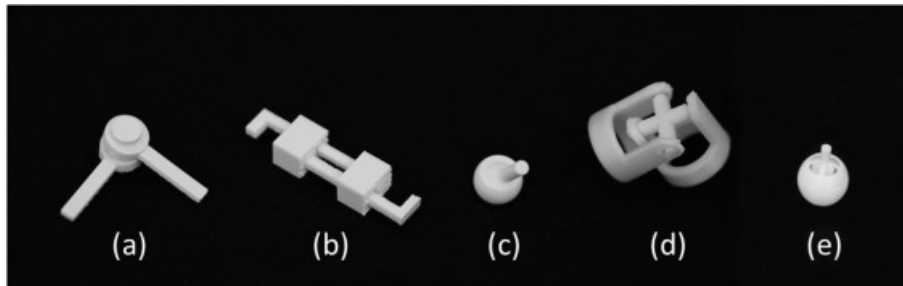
Examples of joint concepts created by non-assembly AM. a) Revolute joint, b) Prismatic joint, c) Spherical joint, d) Universal joint, e) Cage-in-socket joint. [37]
